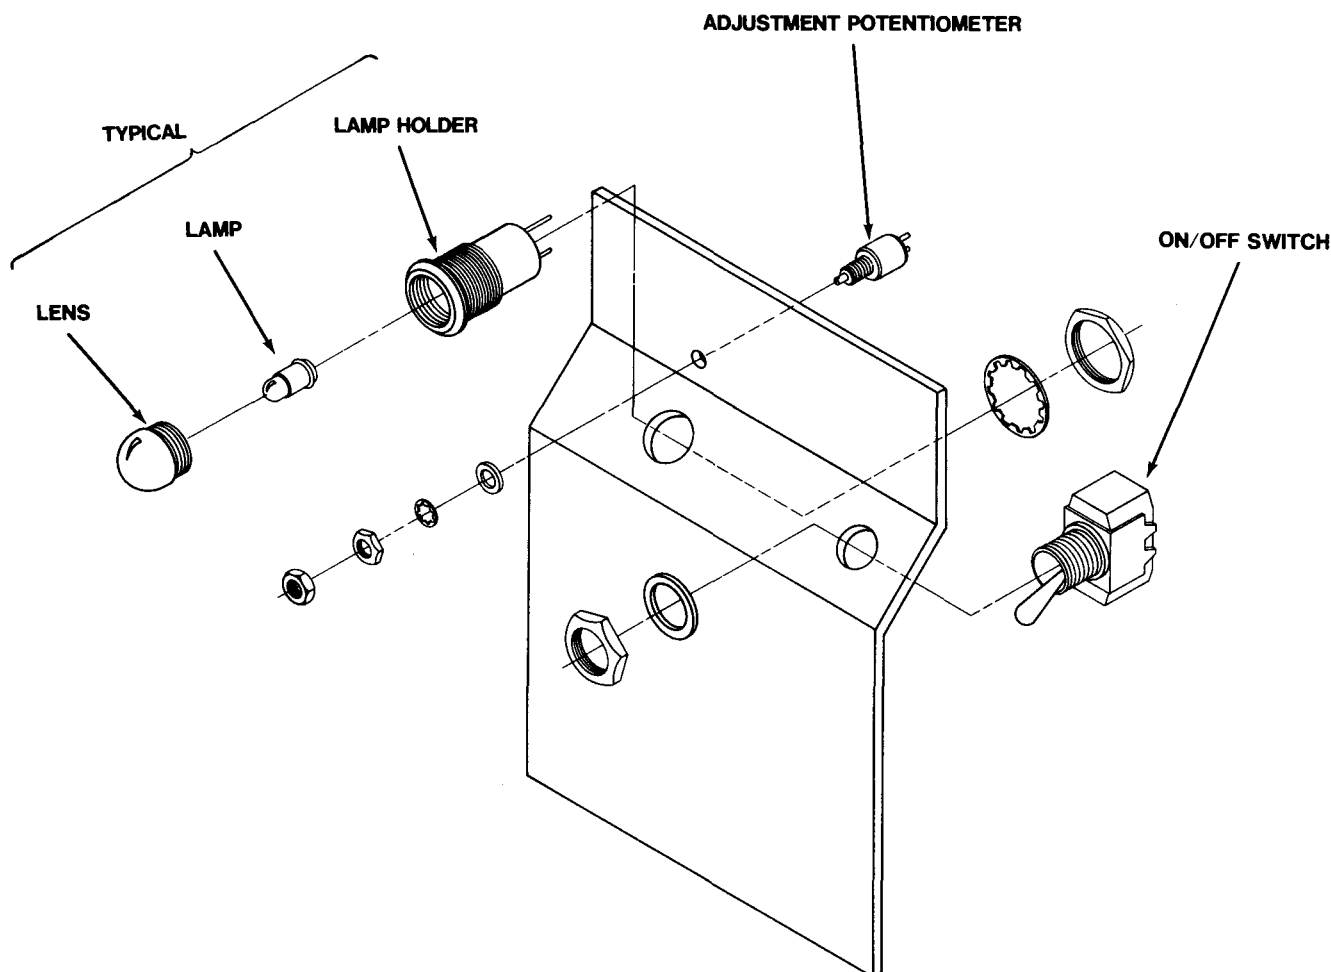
(2).. Front Panel Disassembly (Sheet 2 of 2).
